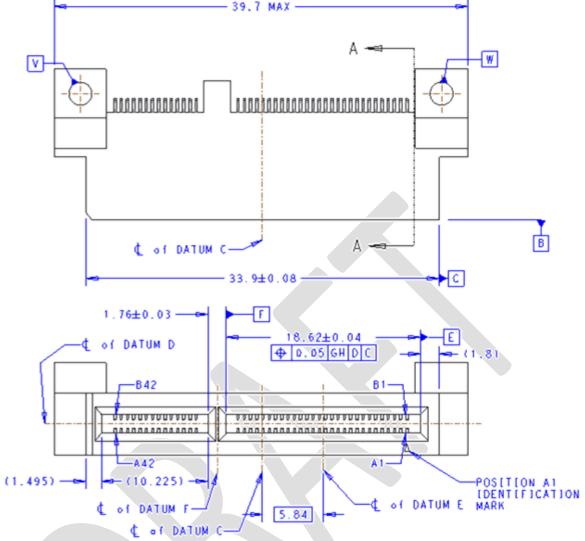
2C STRADDLE MOUNT CONNECTOR DIMENSIONS - FRONT VIEW (MM)
